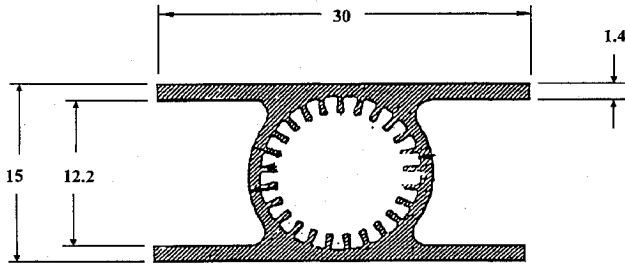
Cross section of heat pipe. All dimensions are in millimeters.
